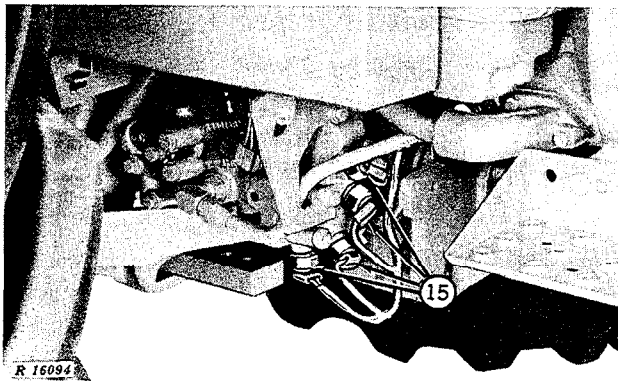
Power Front Wheel Drive Switches (Power Shift Tractor)
